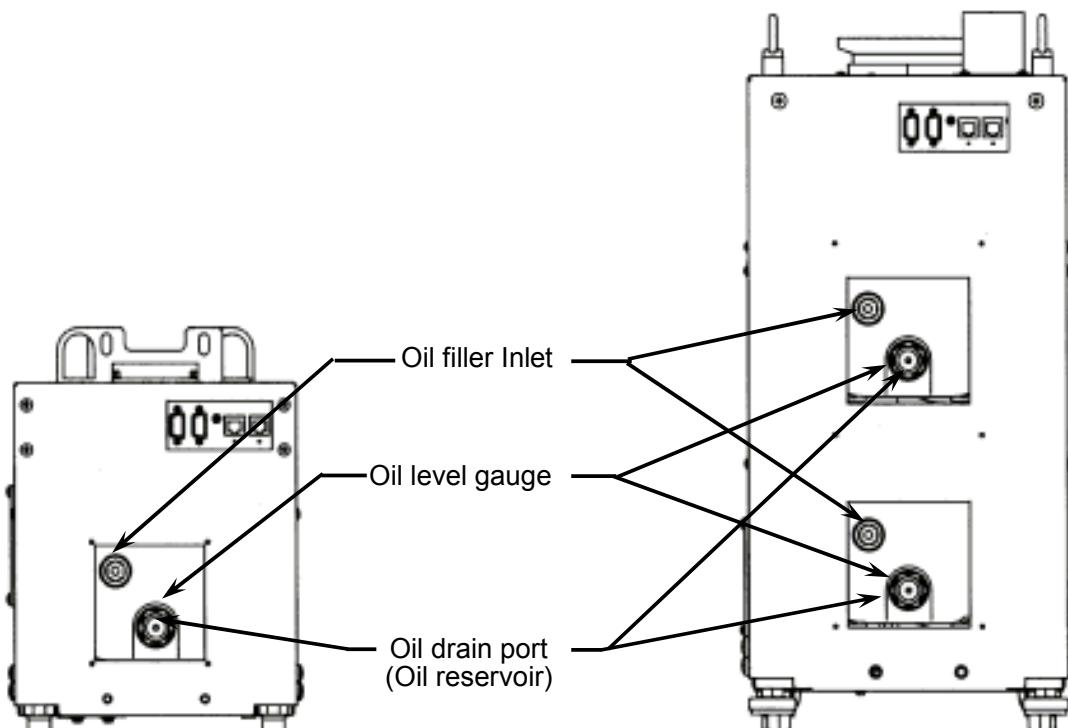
Oil filler inlet, oil level gauge, and oil drain port positions
